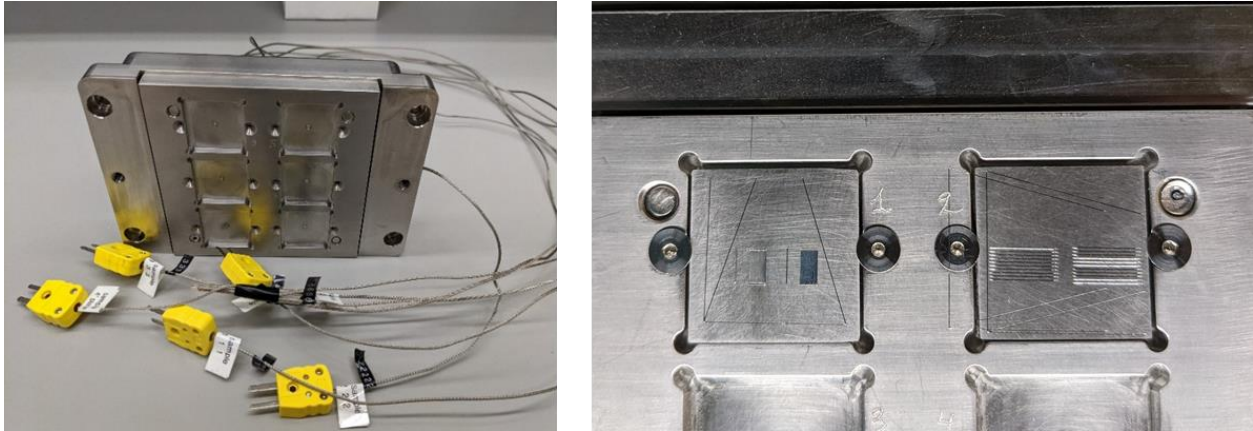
Left: Sample mounting cutouts within the AMMT standard build plate, including thermocouples. Right: Example of samples mounted within the AMMT holder, including a Y-pad and single-line tests.
